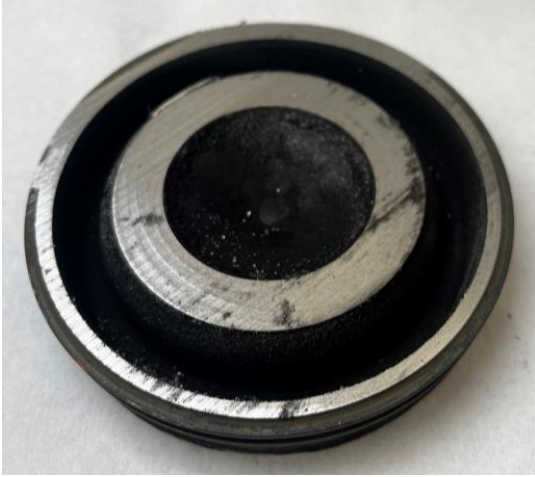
Cross sectional view of piston 11 top part of cooling gallery after cleaning.
